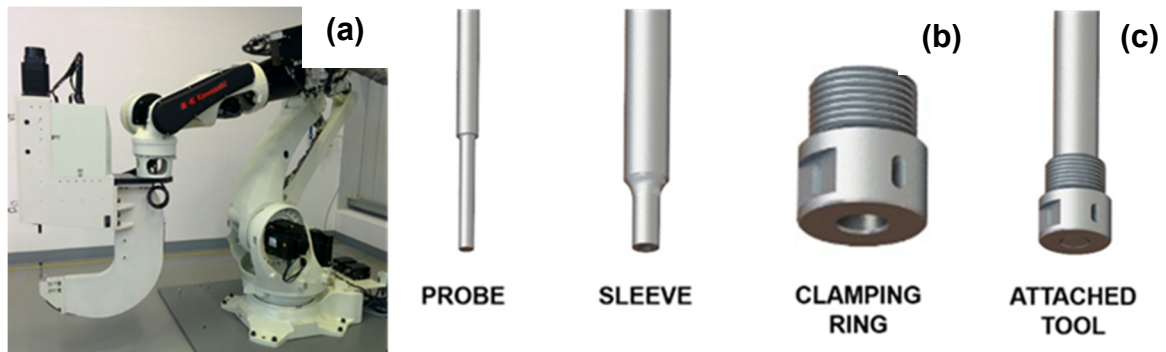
(a) KHI Robot and (b) Tool components: probe, sleeve, and clamping ring with external diameters of 15 mm, 9 mm, and 5 mm, respectively. (c) The attached tool with all three concentric tools.
